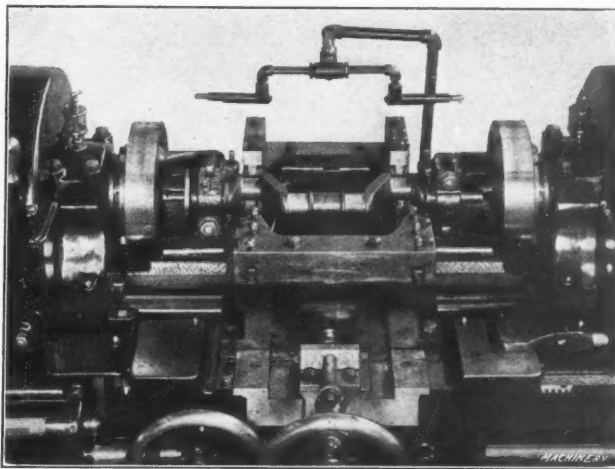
Type B Machine tooling up for turning Outside Crank-pins
